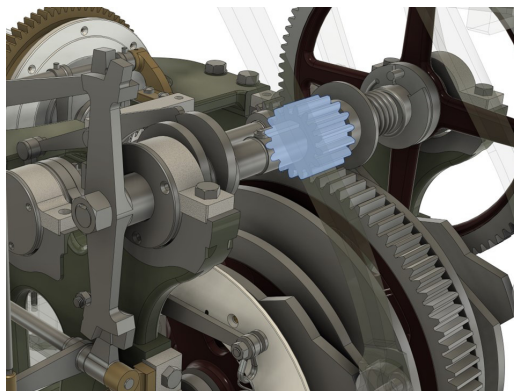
Moveable drive pinion, now disengaged. Image Cumbria Clock Company.
